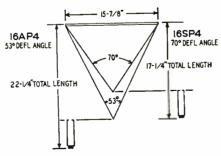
Using a large deflection angle reduces the length of the picture tube.
